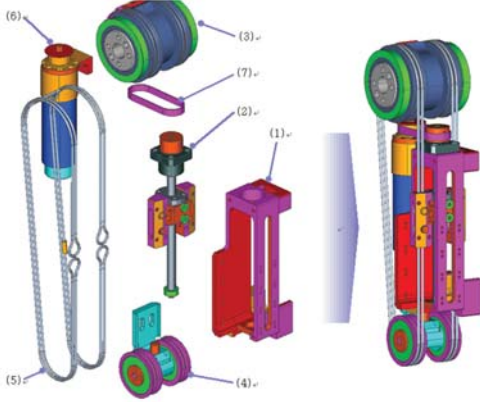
Pitch Joint Module: (1) guide for ball-screw (2) ball-screw (3) joint including torque sensor (4) guid for wire maintaining wire tension (5) a loop of wire (6) motor with gearhead (7) belt of pulley
